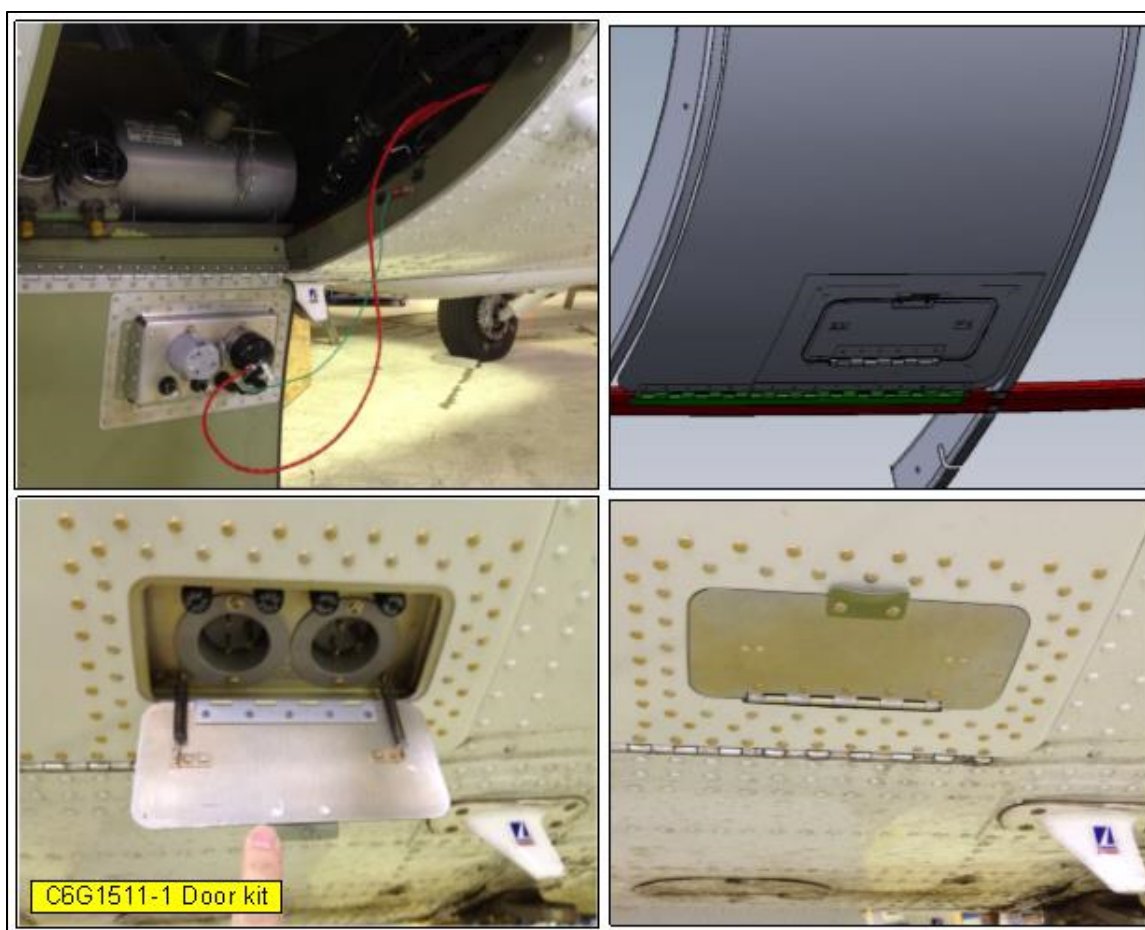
Replacement of existing hydraulic door C6FS1273-27 with Viking Air door C6G1511-1 or install Viking Air kit C6G1511, refer to Viking Air drawings C6G1503 and C6N1004-103, and Tanis instructions TN02070, TN03039, and drawing 03141.
